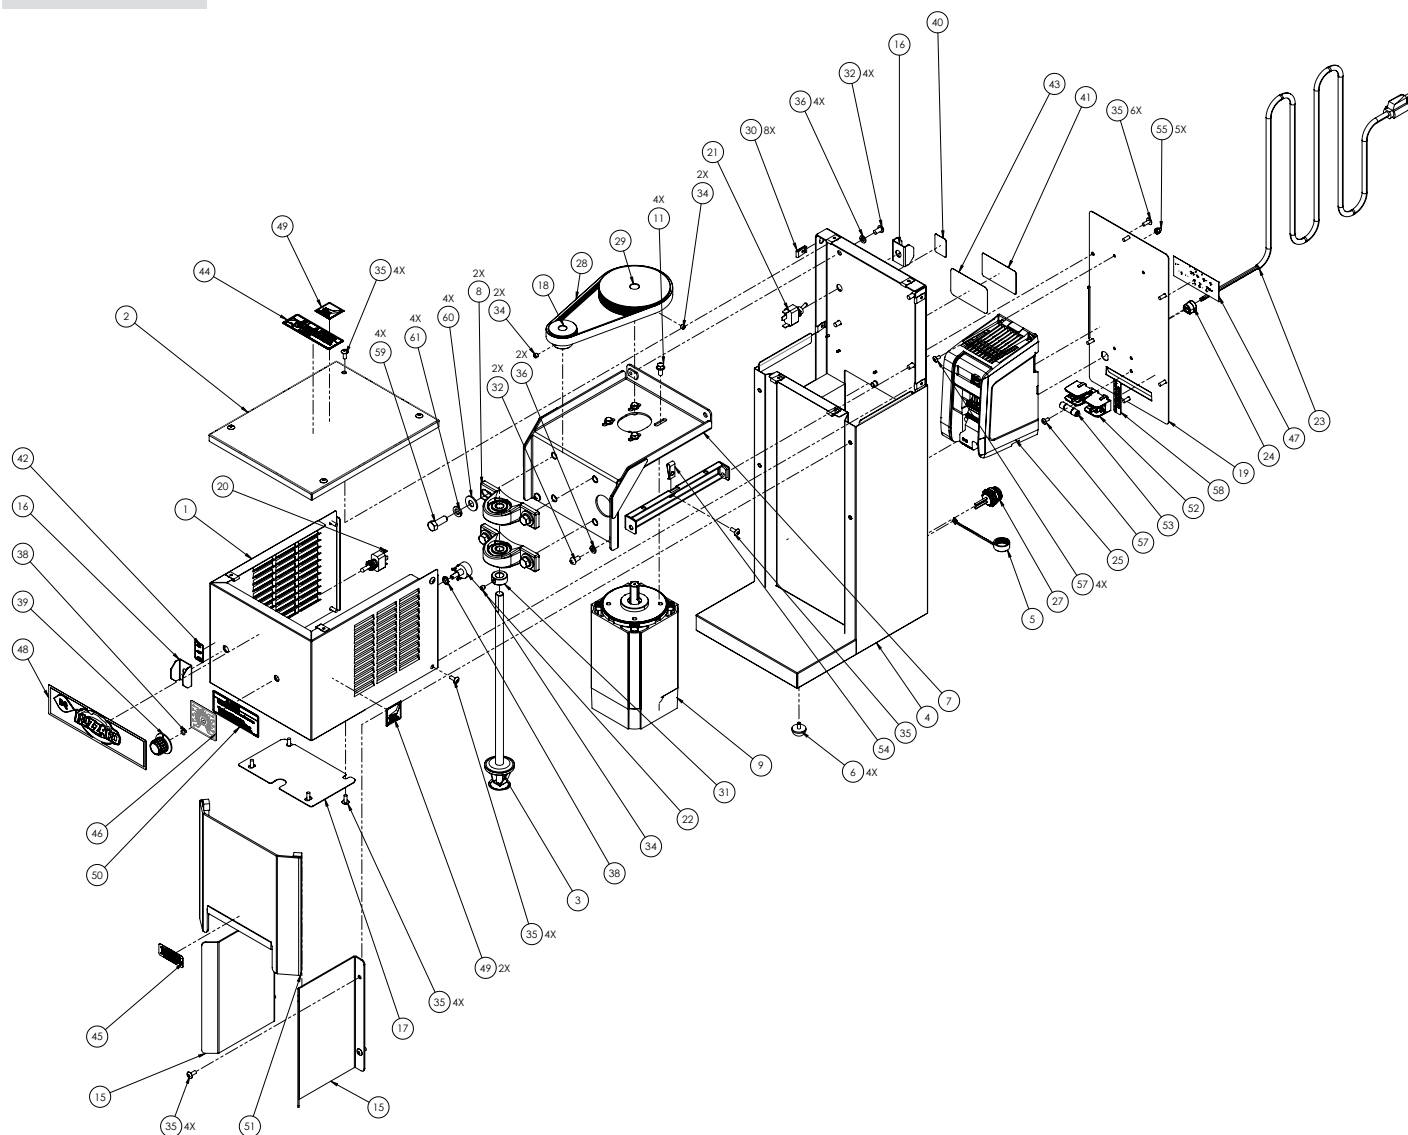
Blizzard® Machine Assembly (Sheet 1 of 5)
